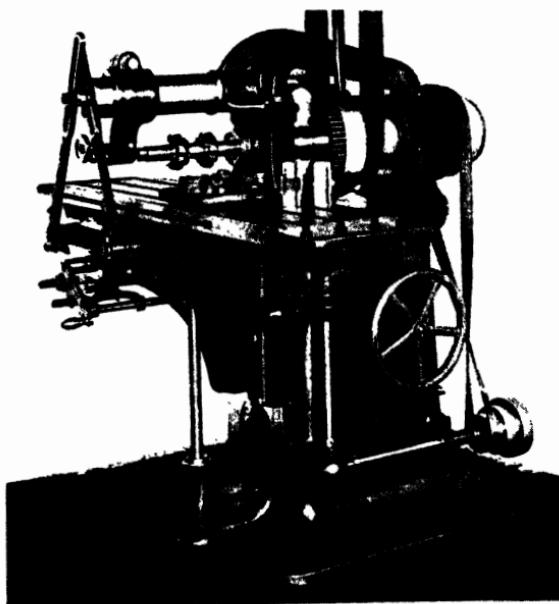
Belt-driven universal milling machine. (*Courtesy of The Brown & Sharpe Manufacturing Company.*)
